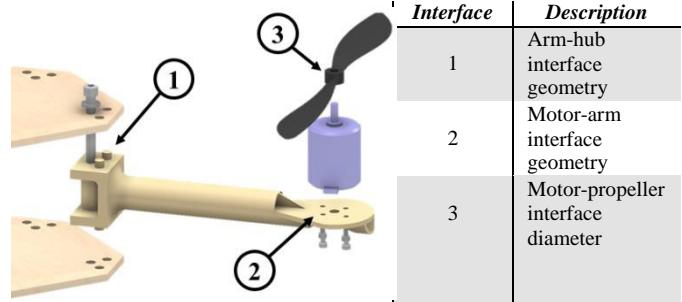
EXPLODED VIEW SHOWING GEOMETRIC INTERFACES ON A MULTIROTOR PLATFORM
